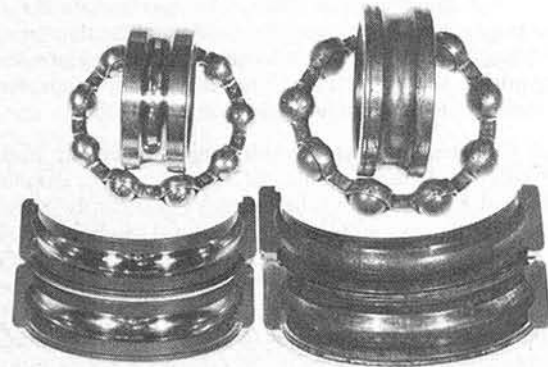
Cutaway comparison on nondrive-end bearing (left) to drive-end bearing (right). Note damage to drive-end bearing races, rolling elements, and cage.
